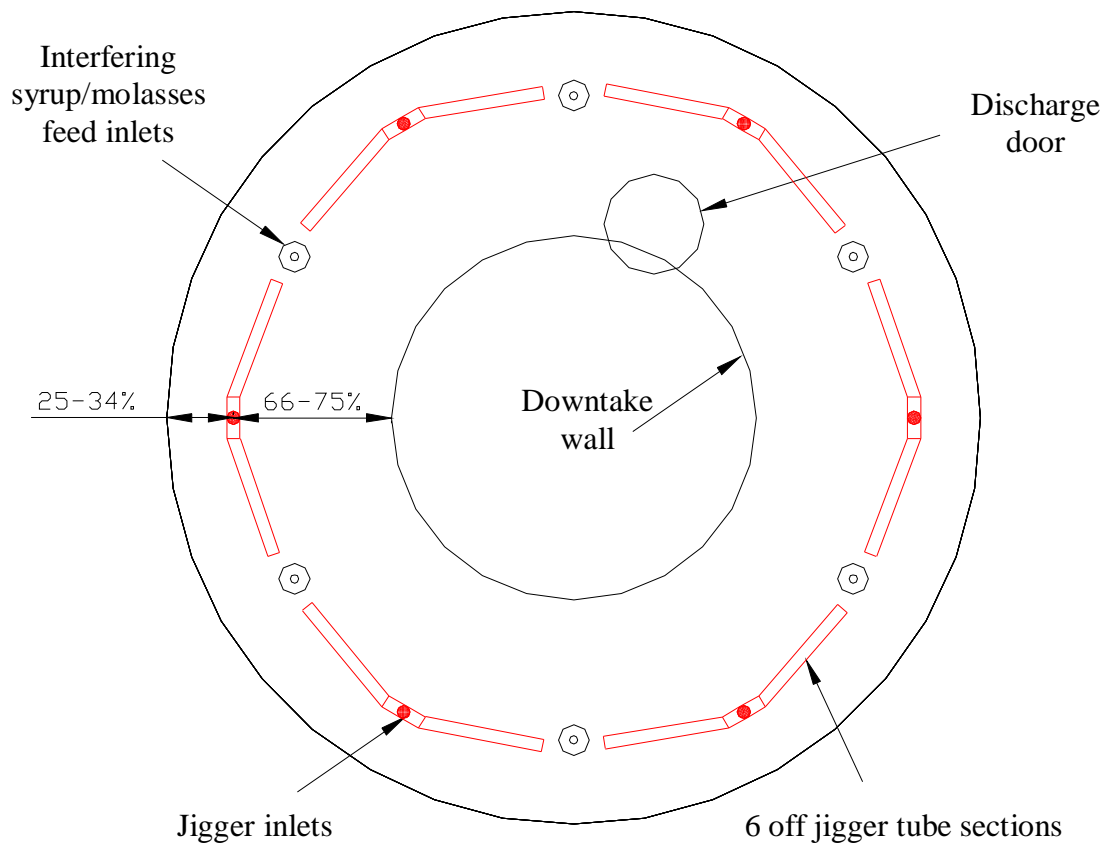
The recommended arrangement for installing the Jigger Tubes System into a batch pan where the PCD of the syrup/molasses feed inlets is similar to the PCD of the Jigger Tubes.
